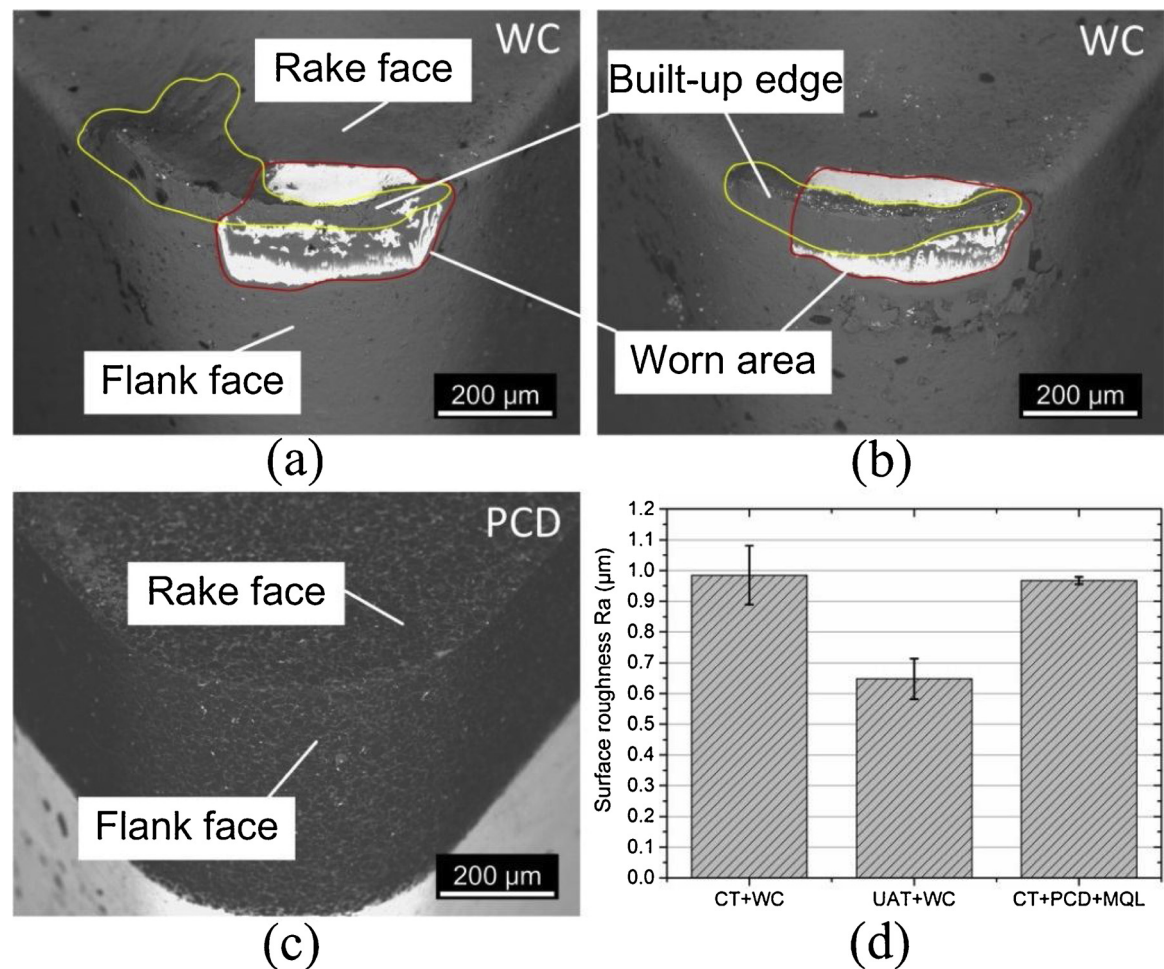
Initial wear state of cutting tools after machining axial distance of 20 mm: (a) CT with WC tool; (b) UAT with WC tool; (c) CT with PCD tool and MQL. (d) Surface roughness of machined surface.
